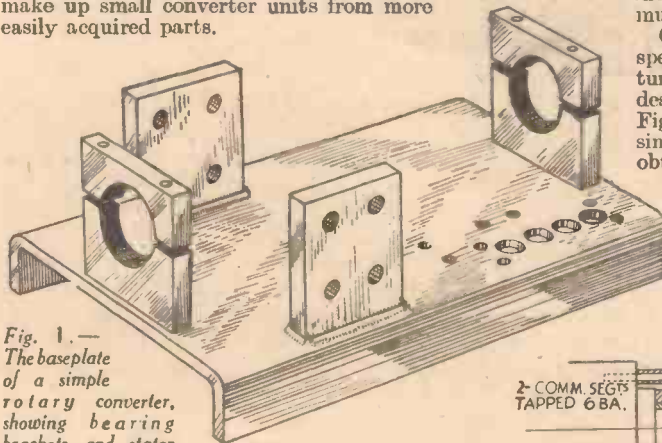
The baseplate of a simple rotary converter, showing bearing brackets, and stator mounting supports.
